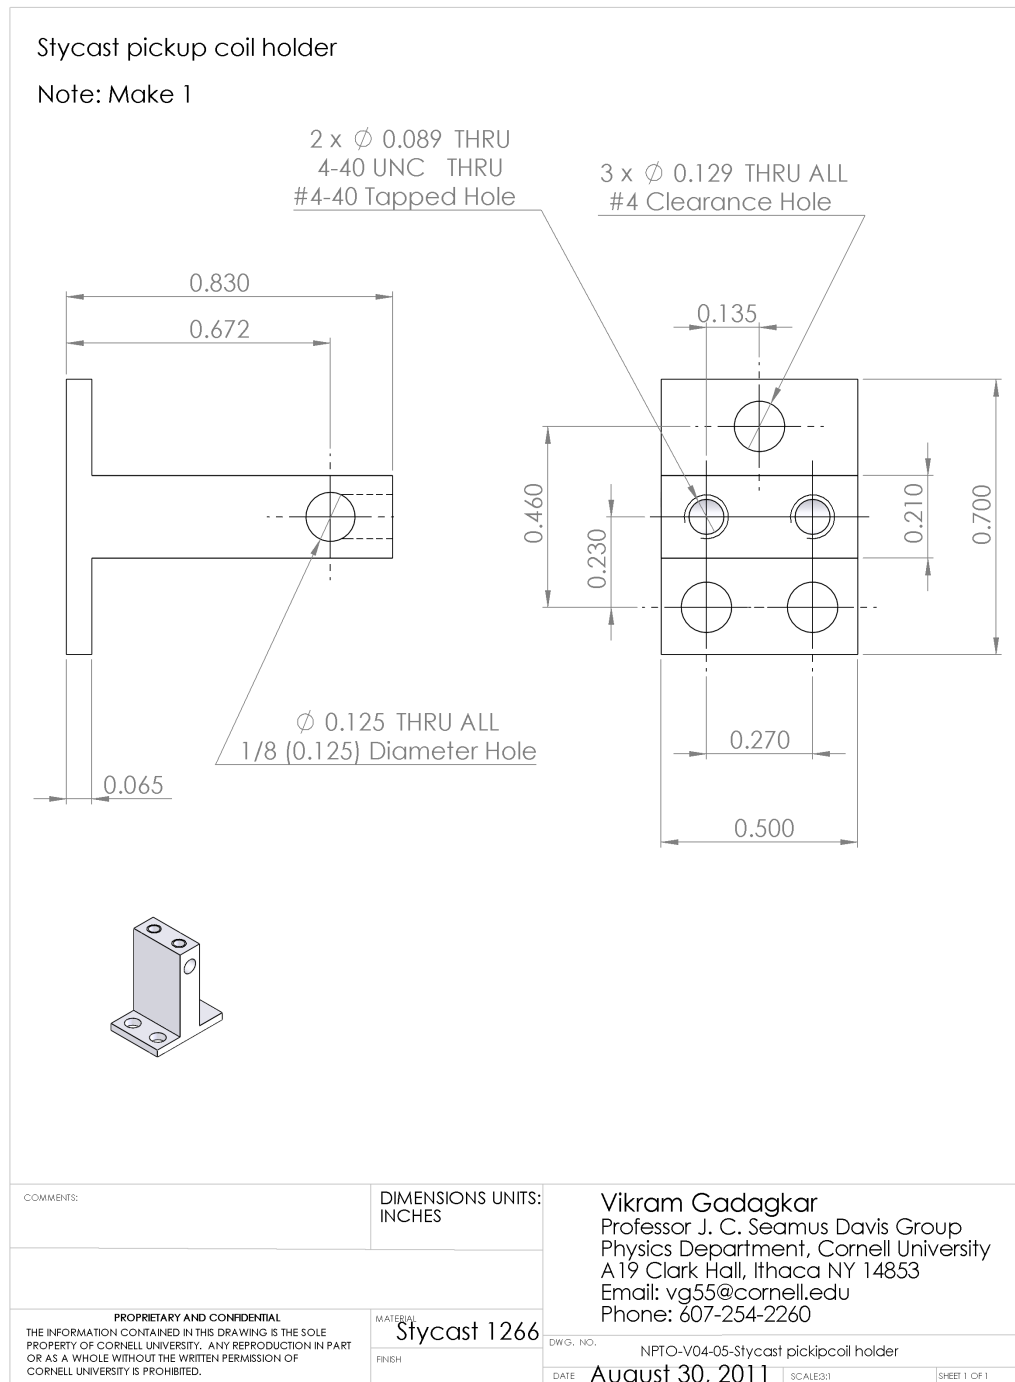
Stycast SQUID pickup coil holder. This holder is mounted on the aluminum platform and holds the SQUID pickup coil used to detect changes in magnetic flux produced by the motion of the samarium cobalt magnet on the torsional oscillator.
